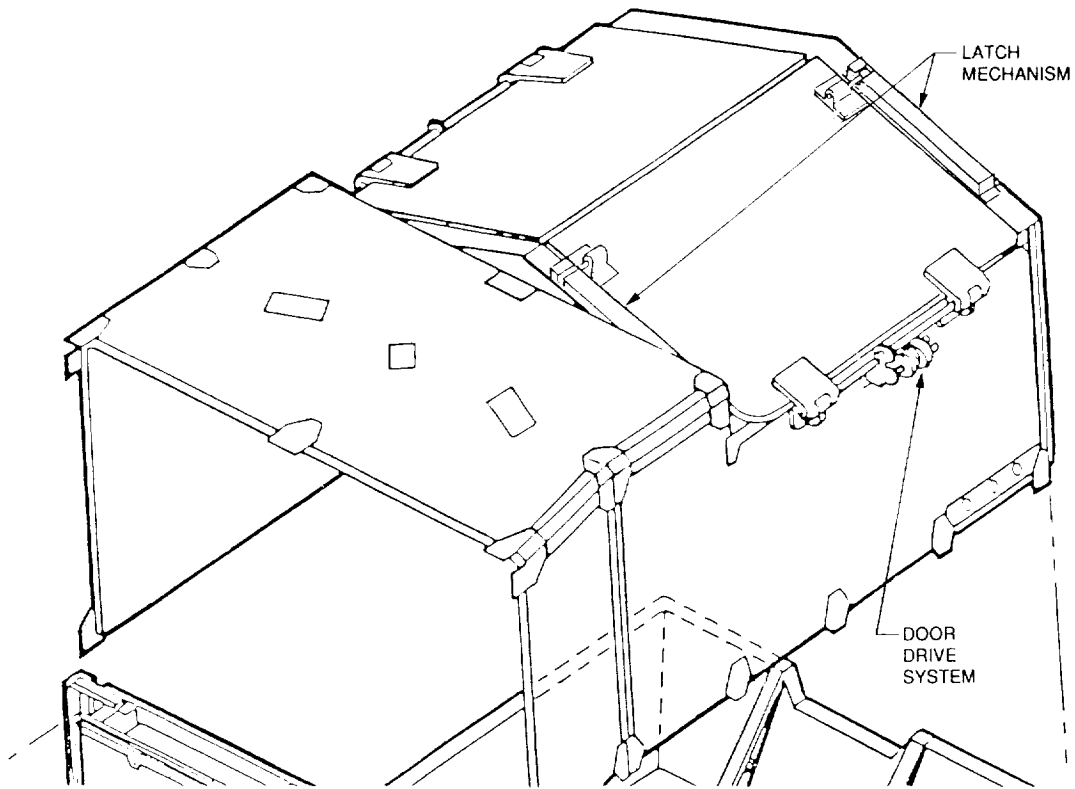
Aft protective Enclosure Assembly, Doors Closed
